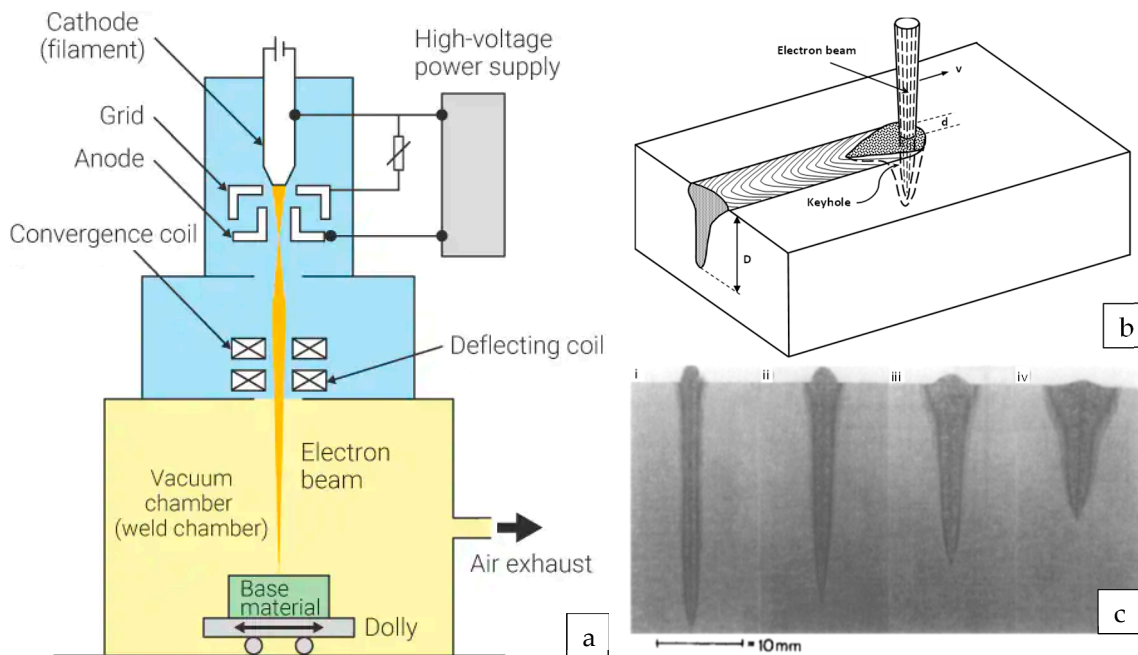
Electron beam welding, (a) Principle of electron beam welding (source: Keyence) [118], (b) Schematic diagram of electron beam welding, D , penetration depth, d , beam focal diameter and v , weld velocity, and (c) Different weld penetration and welding width with different parameters, (i) acceleration voltage 150 kV, focal distance 350 mm, (ii) acceleration voltage 60 kV, focal distance 350 mm, (iii) acceleration voltage 150 kV, focal distance 1200 mm, and (iv) acceleration voltage 60 kV, focal distance 1200 mm, reproduced from [123].
